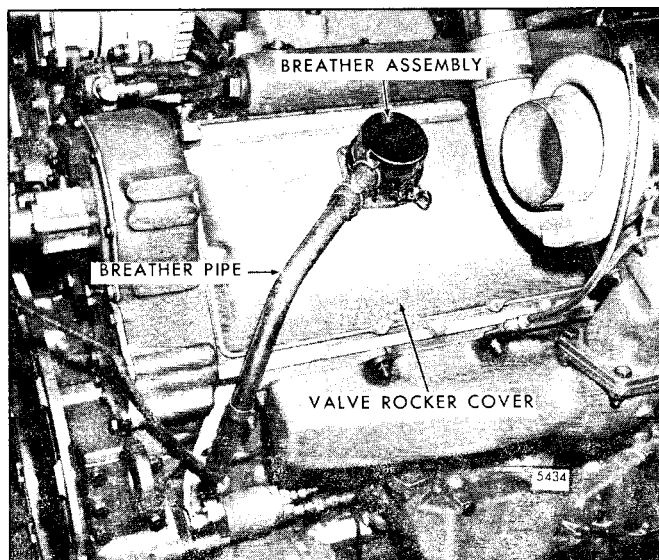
Engine Breather Mounted on Valve Rocker Cover (Former Turbocharged Engines)
